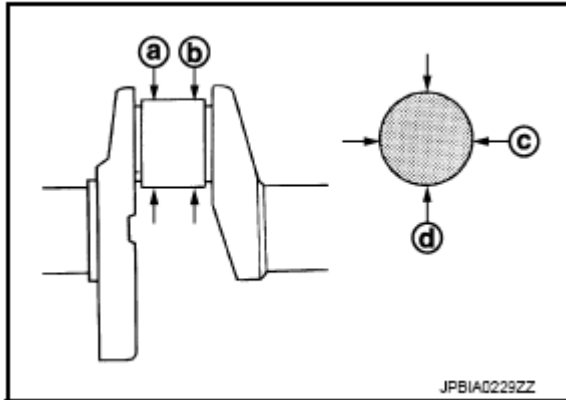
Identifying Crankshaft Out-Of-Round And Taper Measurement Areas
